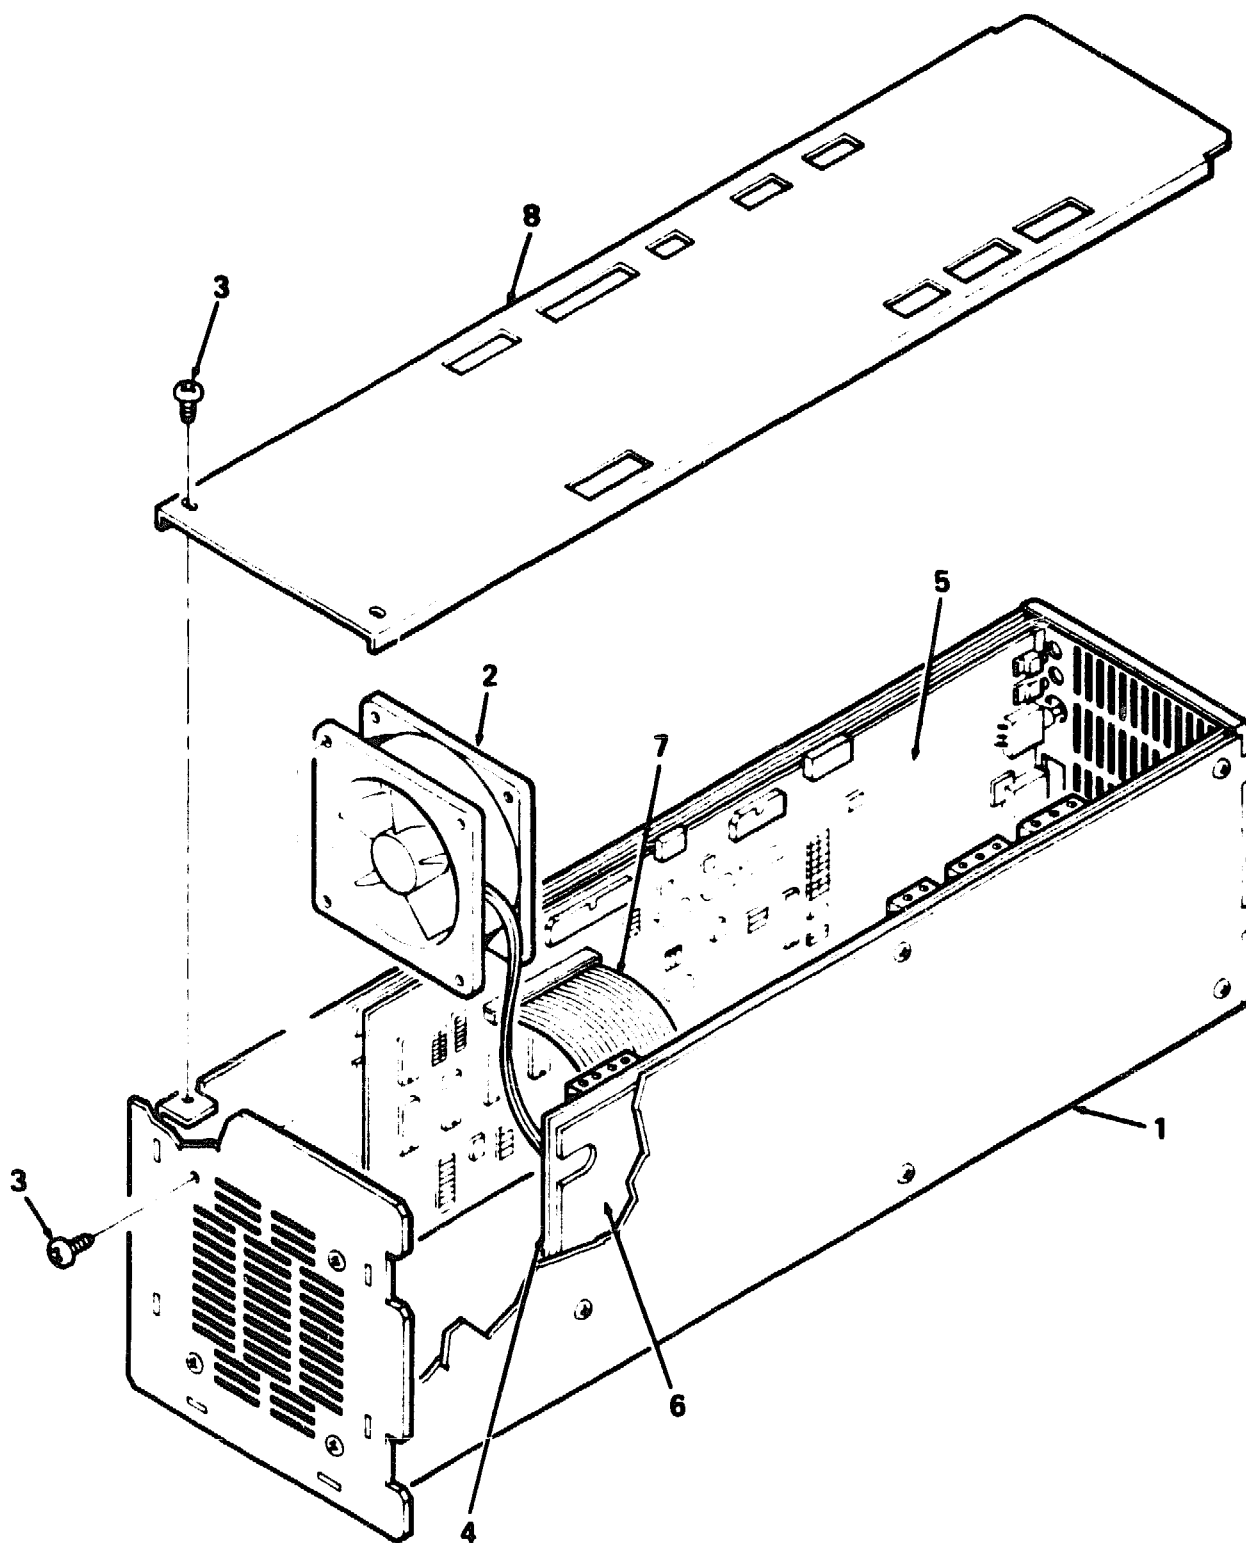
Card Cage Assembly, Dual BI (Sheet 2 of 3)
